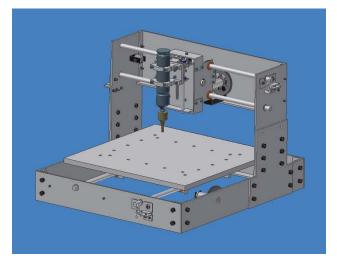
3D CAD model of the CNC milling machine under development at the UMinho.
